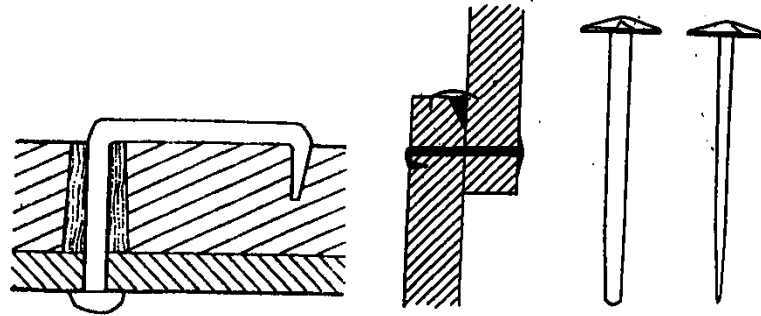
Methods of planking fastening using iron hooked nails. Left: Iron nail driven through a treenail and clenched by hooking to fasten the planking to the frames in Romano-Celtic boats. Right: Iron hooked nails used to fasten the planking in cogs. (McGrail, 2006, p. 38, fig. 27).
